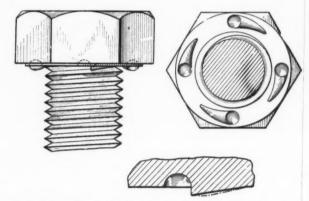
Cutting tools upset on bolt or nut raise tongues on work which lock the fastening
